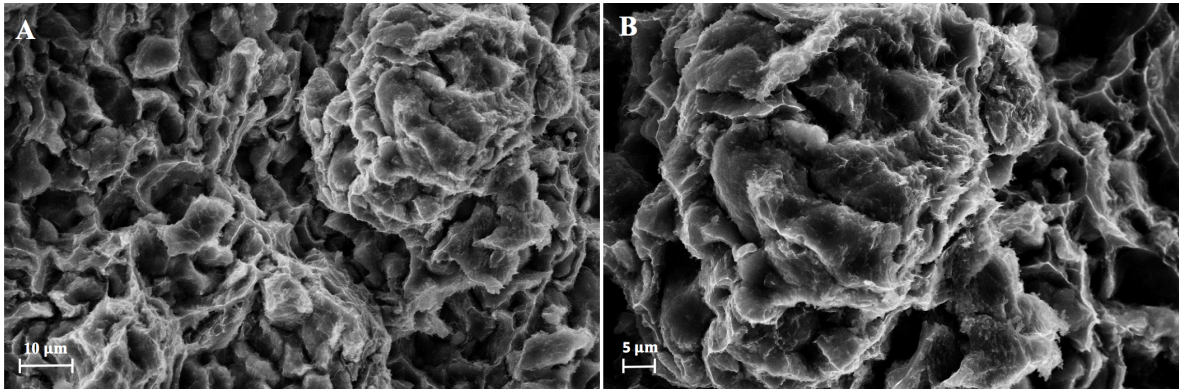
Fracture surface of the pure hot compacted-hot extruded aluminum powder at A) low magnification B) higher magnification.
